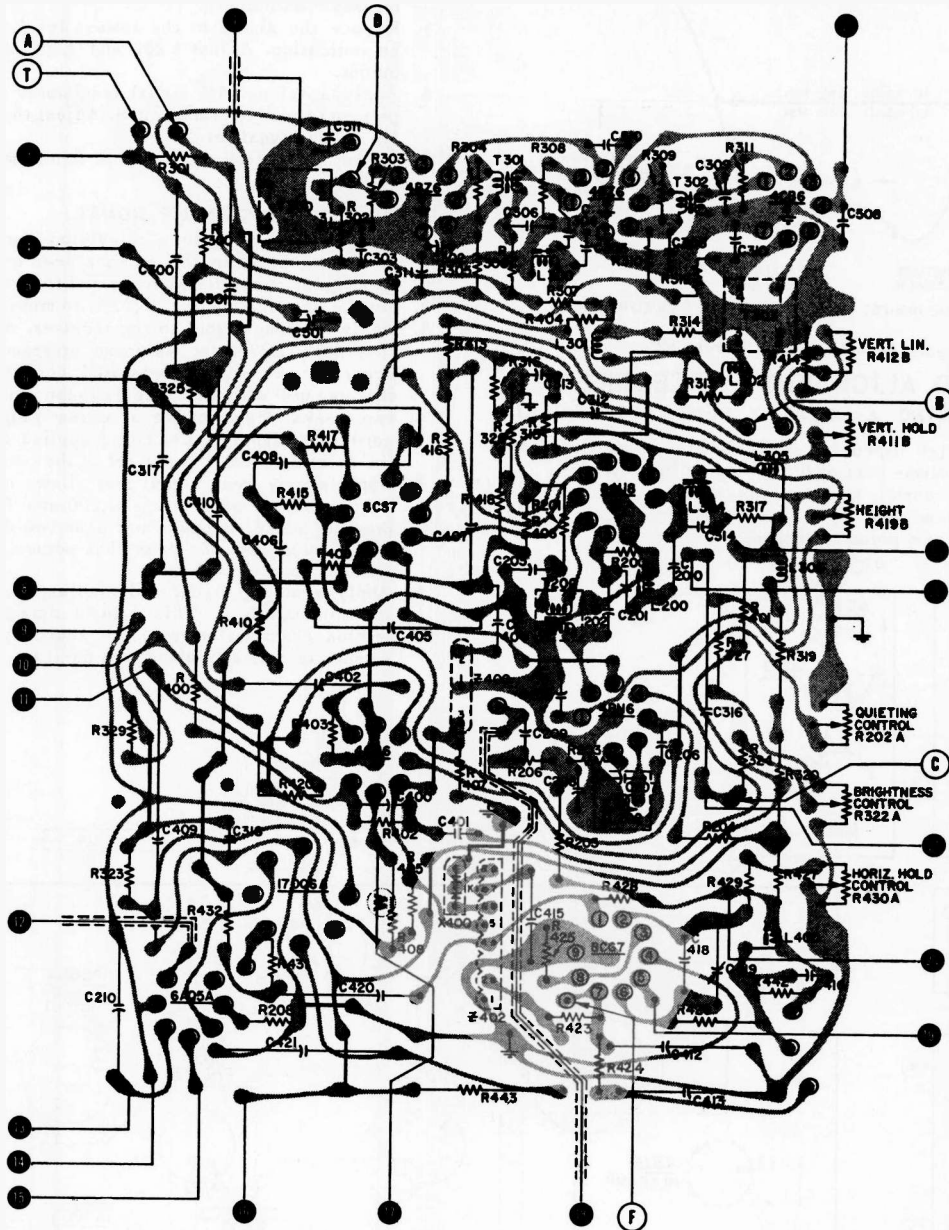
Bottom View of Printed Board Showing Top Components as Schematic Symbols
